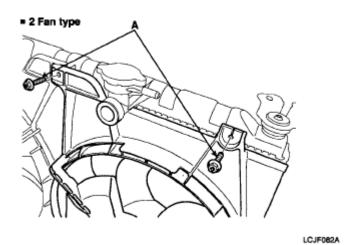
Identifying Cooling Fan Mounting Bolt (1 Of 2) Courtesy of HYUNDAI MOTOR CO.
